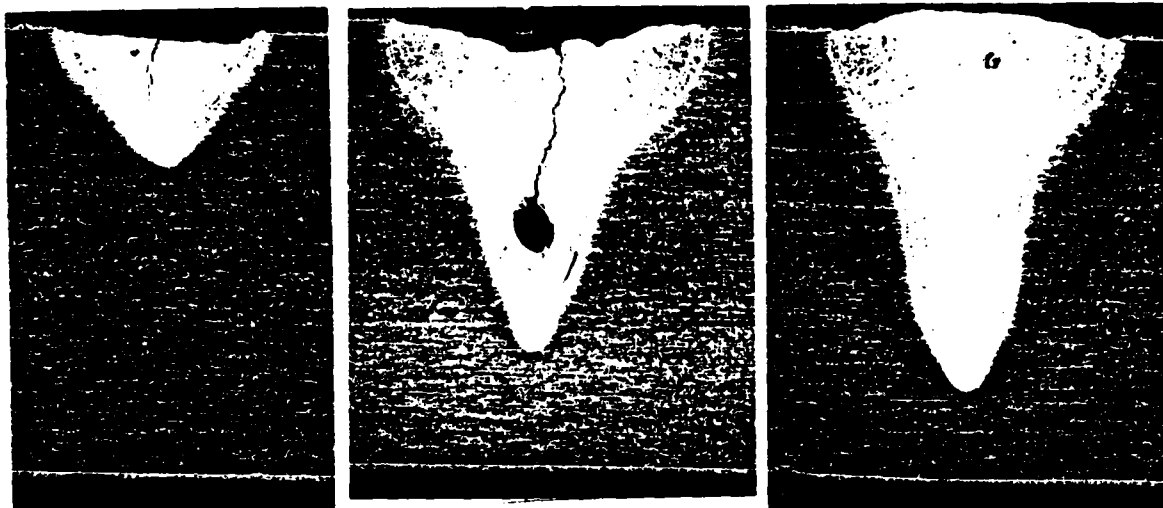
Laser welded aluminum bead on plate showing effect of power levels on weld bead penetration. Mag 6X.
